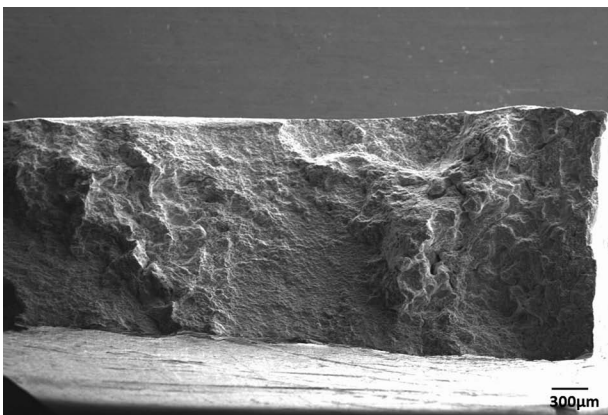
Fracture surface of a room temperature tensile-tested dissimilar AA 2219-AA 5083 TIG weld joint that failed on AA 5086 side. Low magnified fractograph
